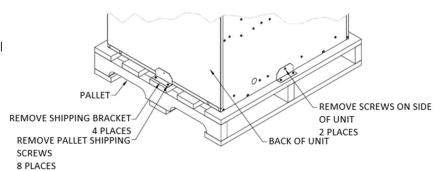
Standard Packaging with Shipping Brackets - Back View
